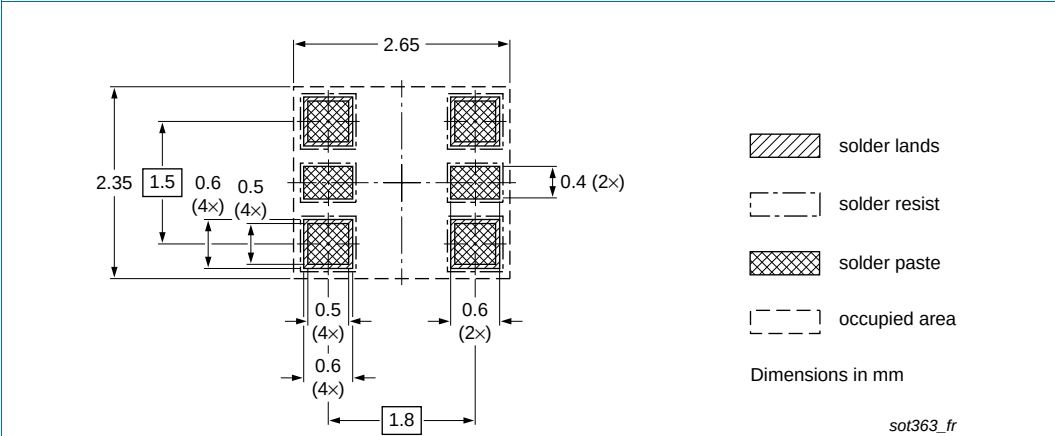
Reflow soldering footprint BAS16VY (SOT363/SC-88)
